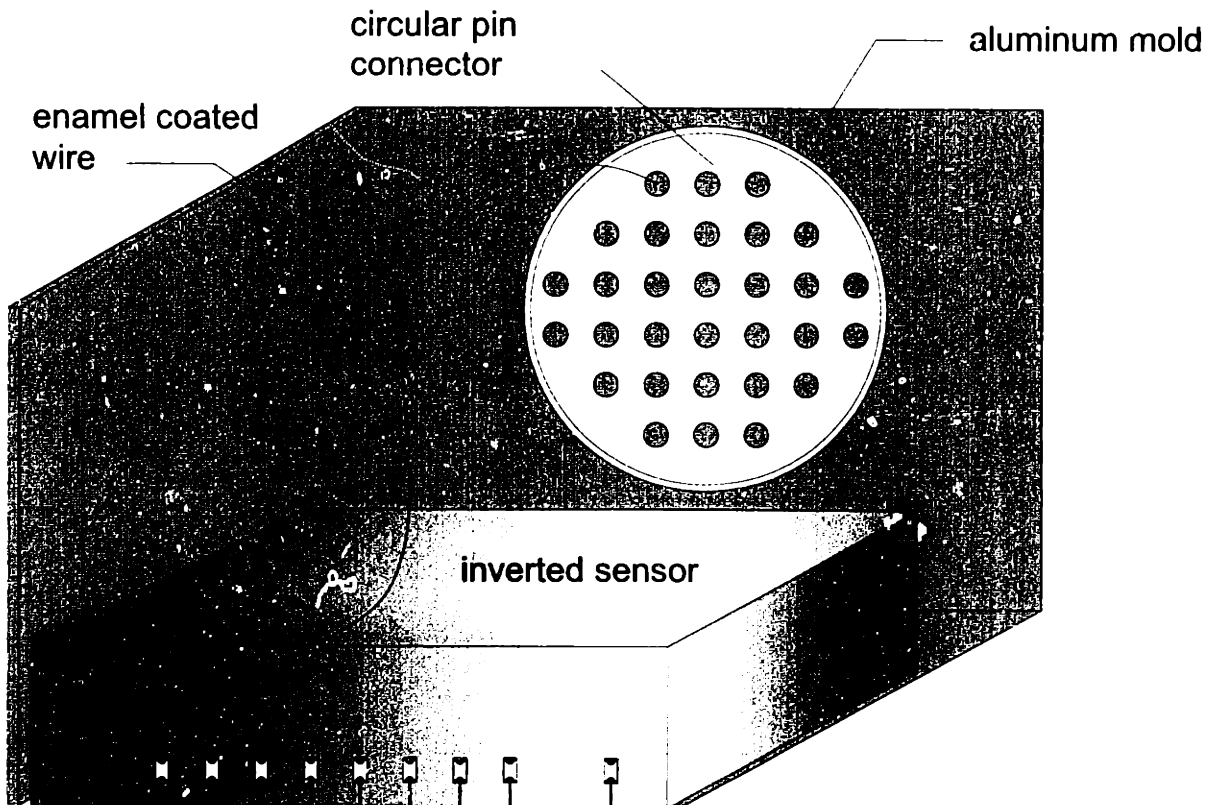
The sensor is inverted inside the exterior mold and connections are made from backing terminal to circular pin connector with enamel coated wire.
